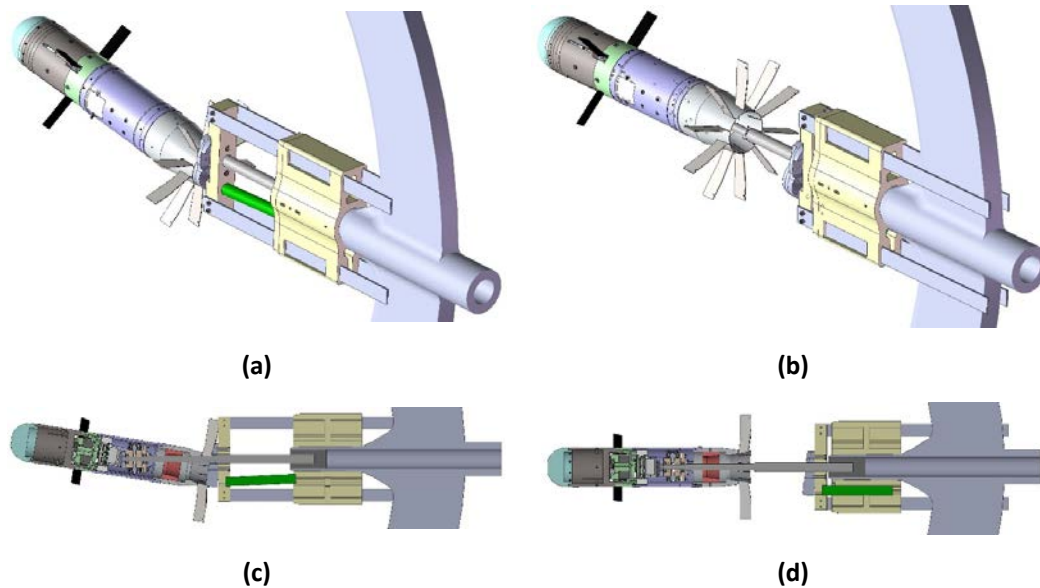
Isometric view of the a) locked and b) unlocked model; cross-sectional view of the c) locked and d) unlocked model
